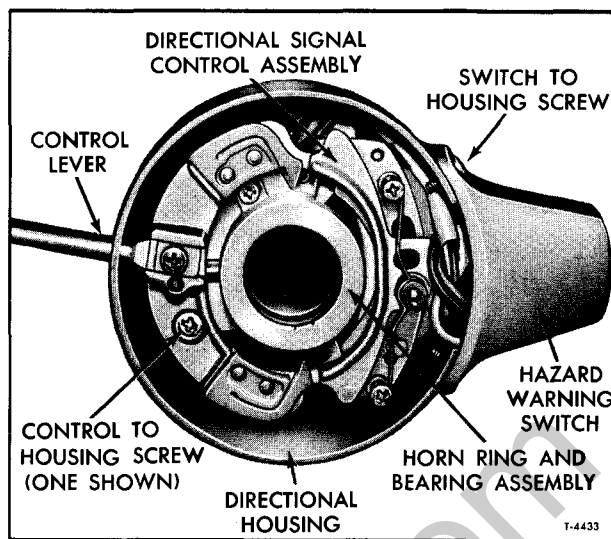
Directional Signal Control Assembly (Tilt Cab Models—Except Alum. Tilt) (Typical)
